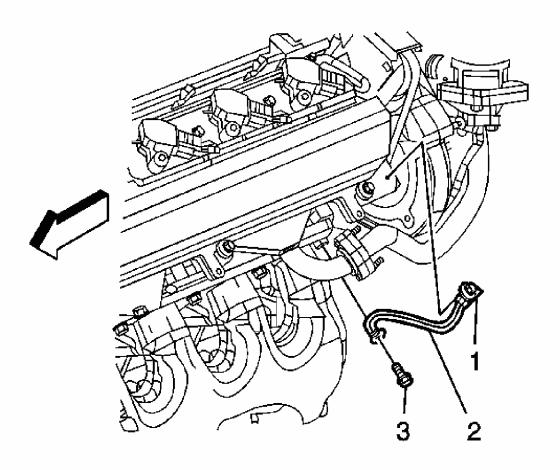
Identifying ICM Wiring Harness Ground Courtesy of GENERAL MOTORS CORP.
